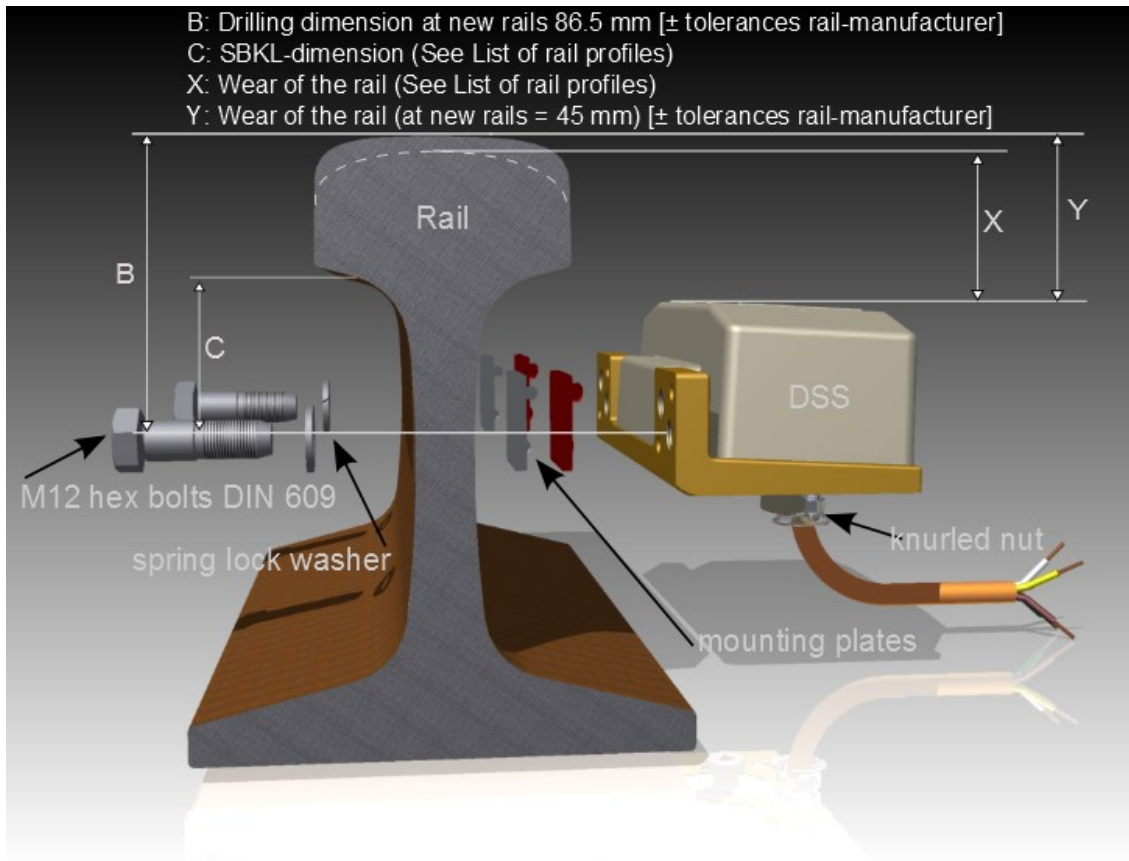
Double wheel sensor installation drawing (without reduction plate)
